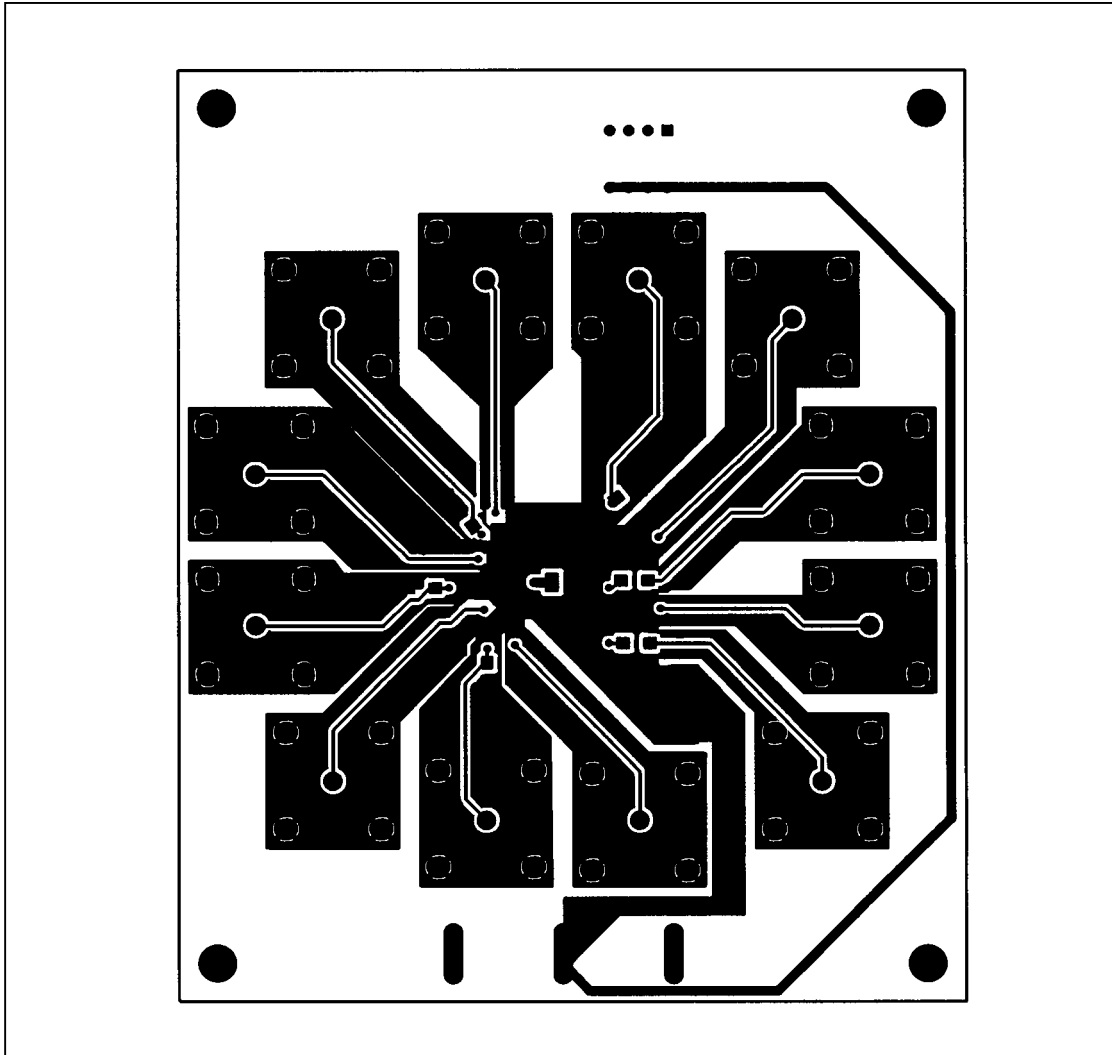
MAX464/MAX466 EV Kit PC Board Layout—Solder Side
